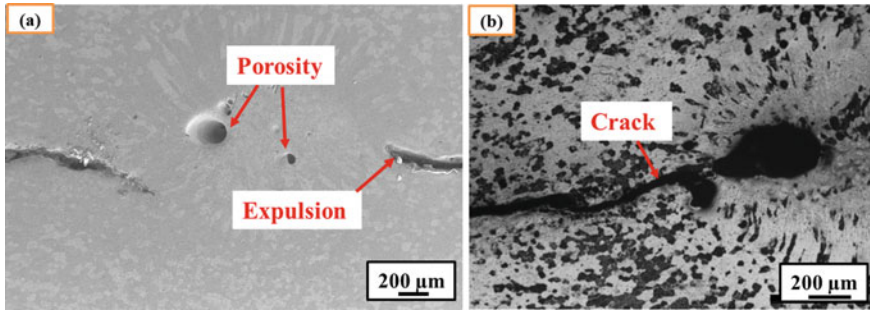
Defects in resistance spot welds of AA6063 alloy
